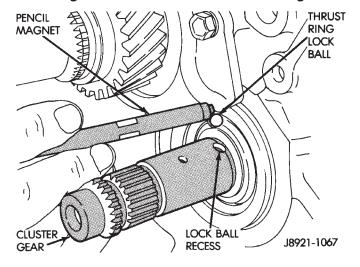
Remove Fifth Gear Thrust Ring Lock Ball
